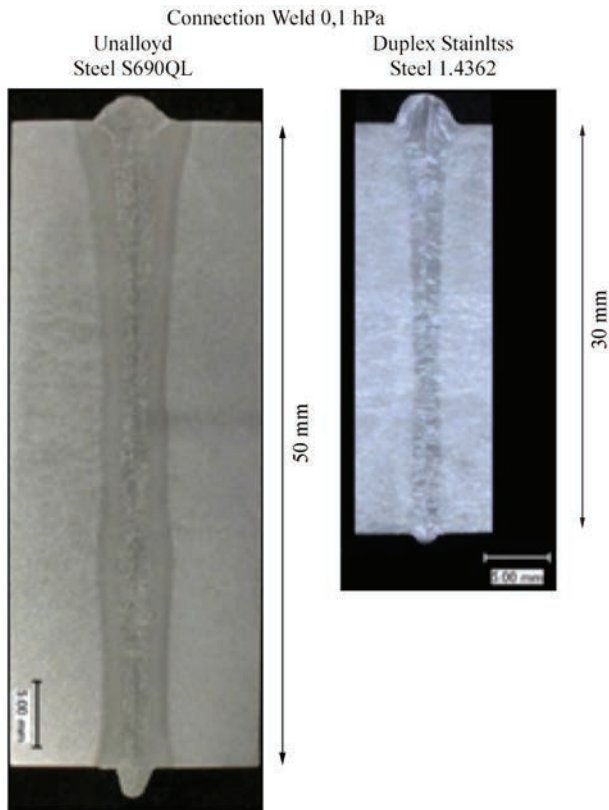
Connection weld unalloyed steel (50 mm) and duplex stainless steel (30 mm)
